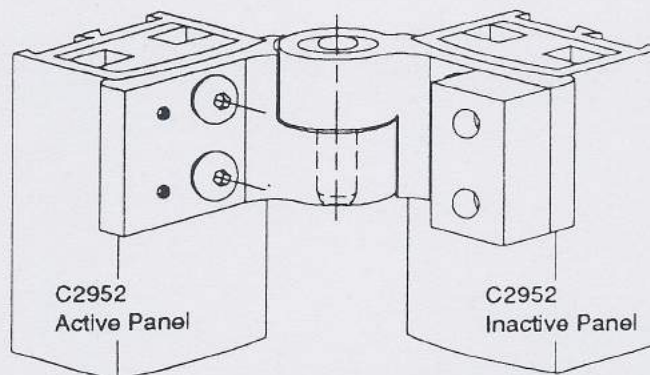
, Assembled View of LHR Hinge Assembly Mounted to Vertical Rails
